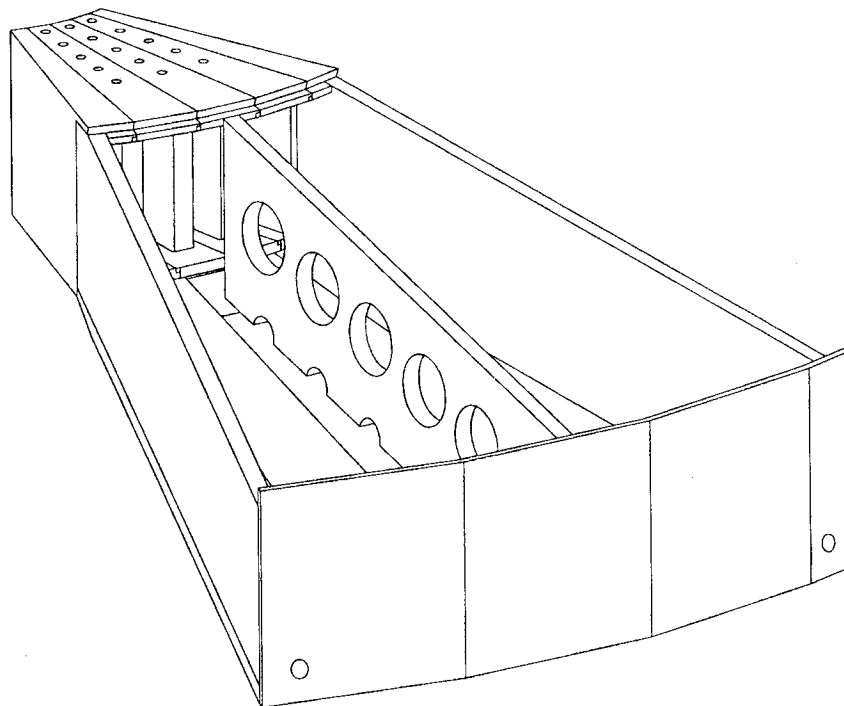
Full-Scale, 1/10 Segment Heat Pipe without Top Plate and Wick Structures.
